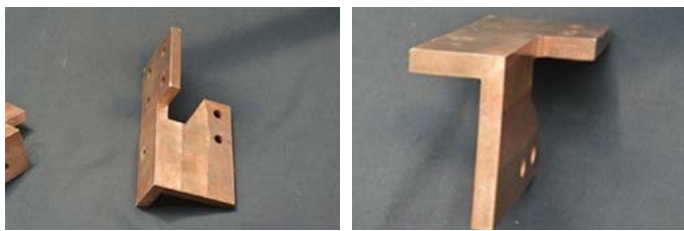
Exemplary technology-based conductor rail made using the FSW method
